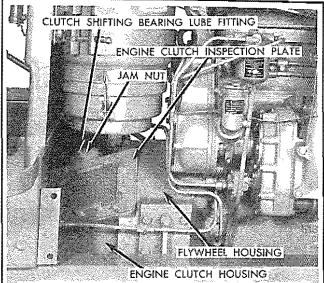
Checking Lever Pull to Engage Engine Clutch
